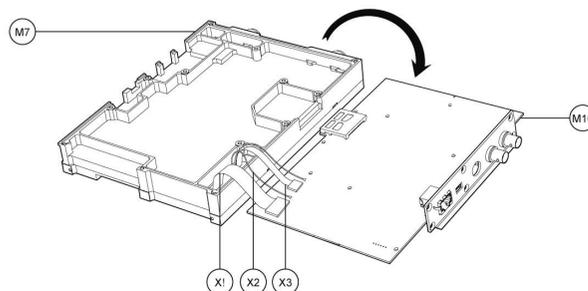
Replace MAINBOARD-RF FLAT CABLE 26P, MAINBOARD-RF CABLE 12P, COAX CABLE
